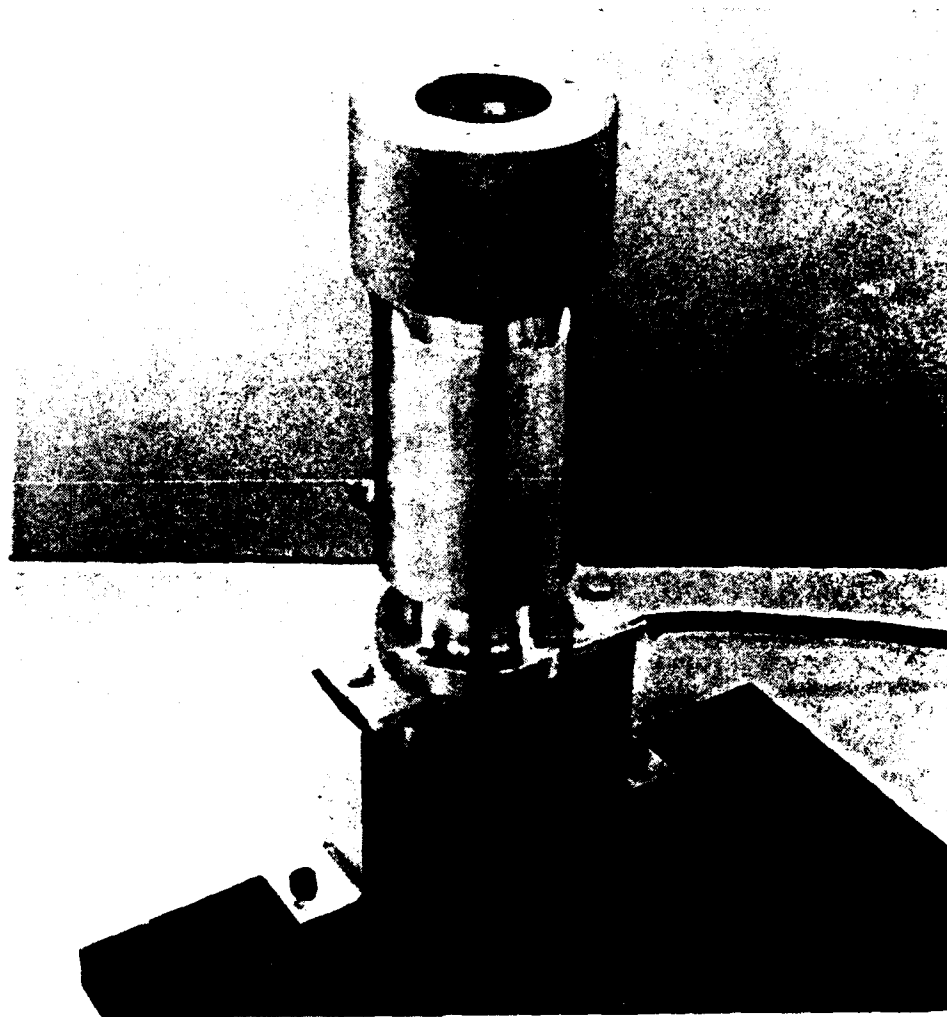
(b). Photograph of vibrational test fixture and coupling chuck (35mm ID) to hold crucible support tube.
